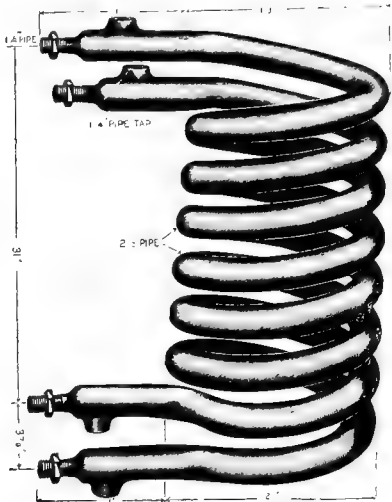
Gold's Double Duplex Coil with Welded Ends; 2½ in., No. 609A.
